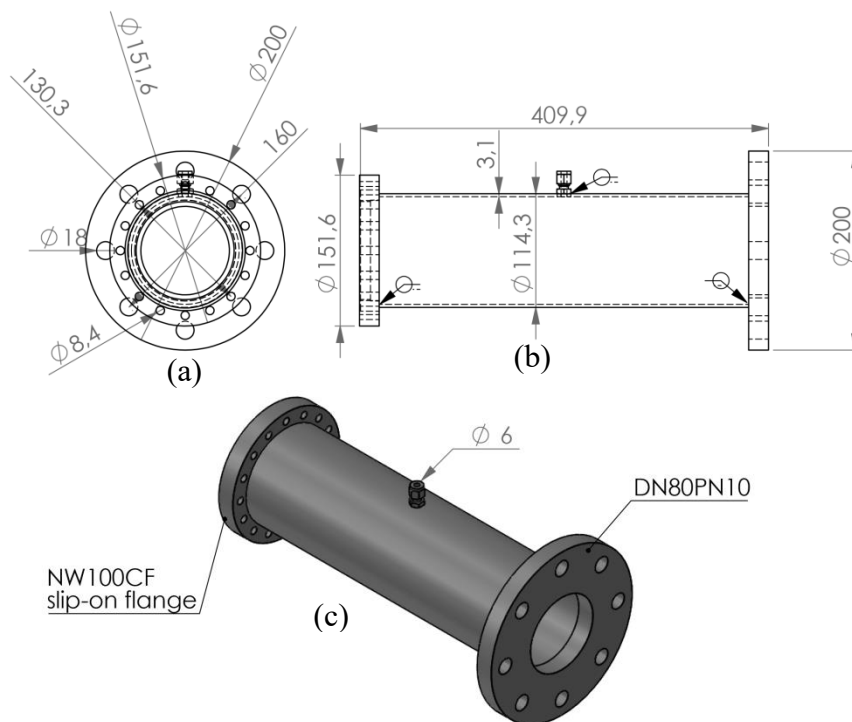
Mechanical design of the sub-chamber, (a) side view, (b) front view and (c) isometric view, all dimensions are reported in millimeters.
